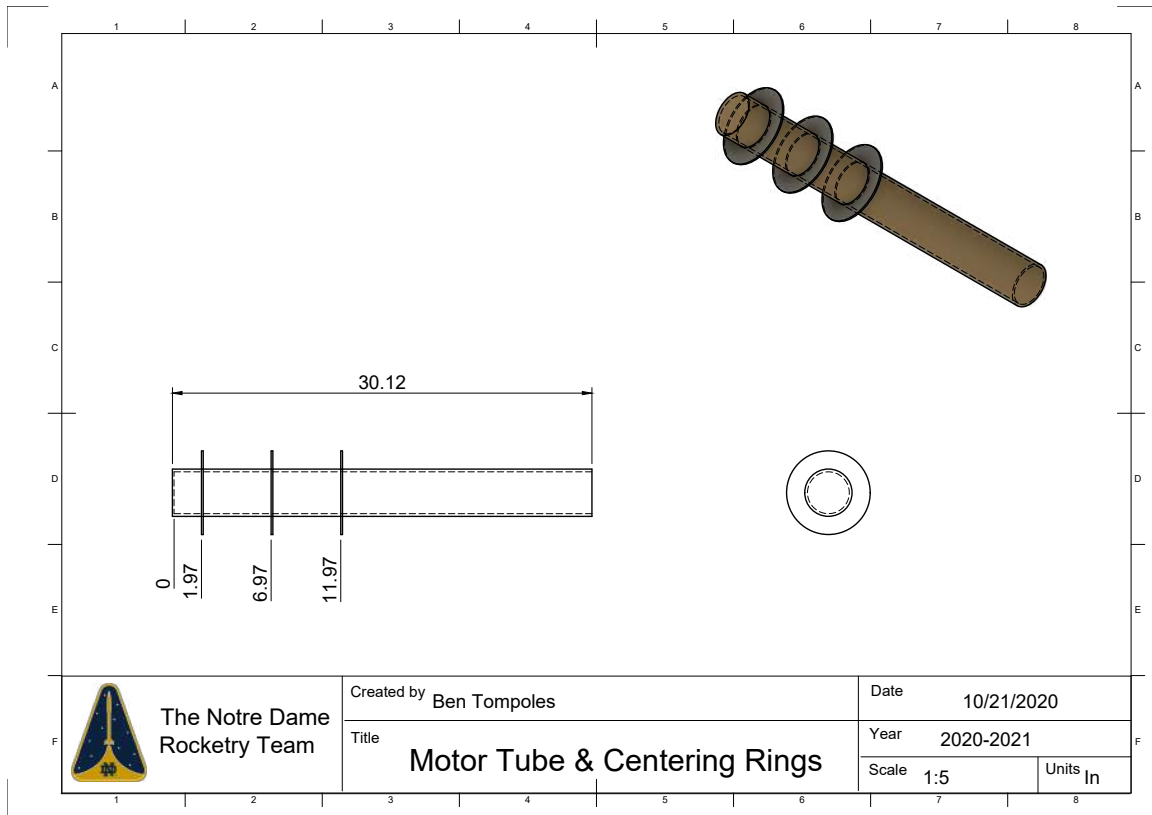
CAD drawing of the centering rings mounted on the motor tube
